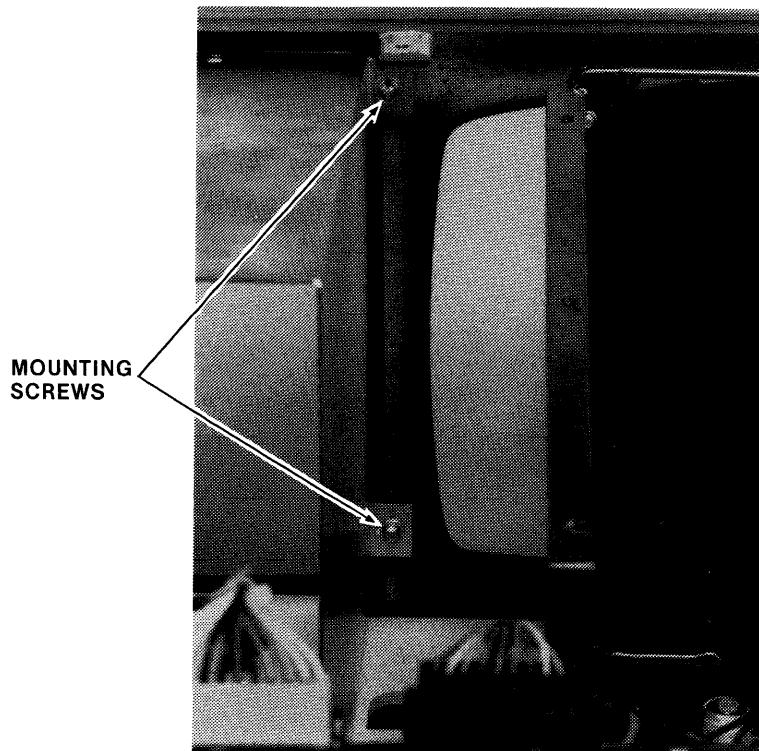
Disk Drive Mounting Bracket Mounting Screws
